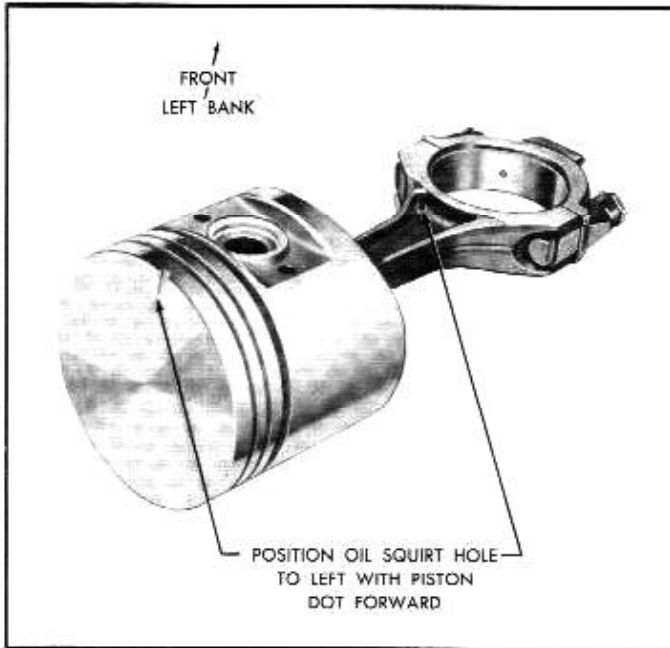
C-84—Position of Piston and Connecting Rod Squirt Hole — Left Bank — Typical
